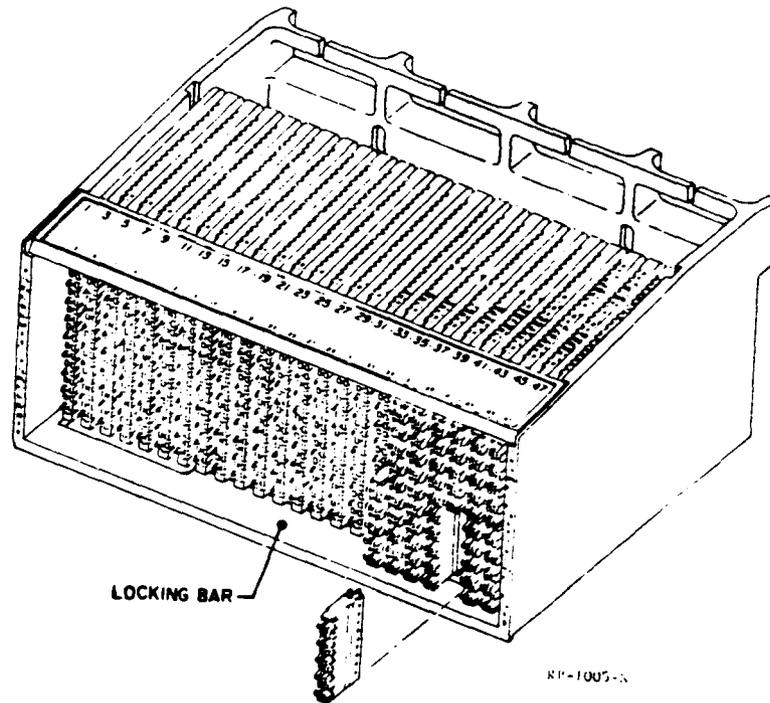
TYPICAL 93 CONNECTING BLOCK (PAR. 1.21)
